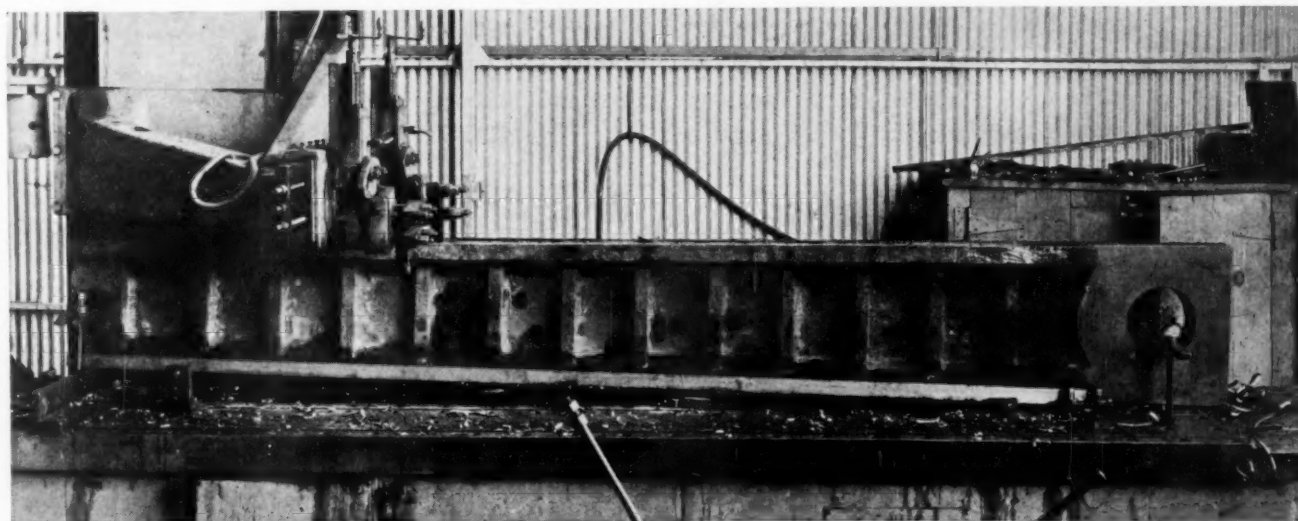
MOVABLE-WEDGE UNIT ON OPEN-SIDE PLANER
